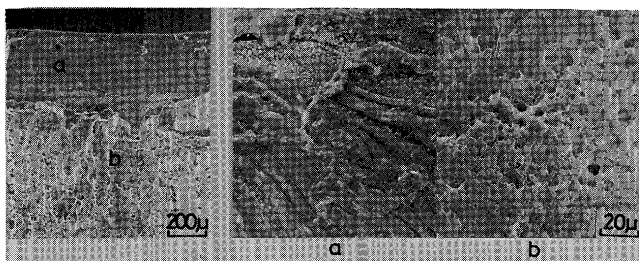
SEM of fracture surface after bending test (5083 alloy).
